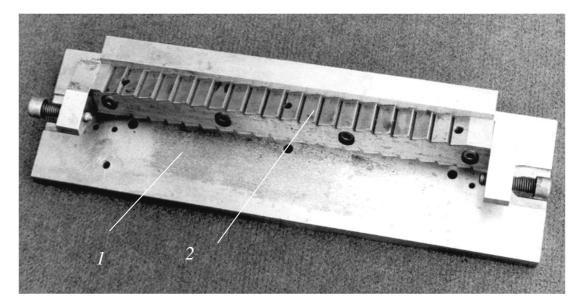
Device for sharpening of the teeth of prefabricated disc cutter: 1 - basic plate; 2 - rack.
